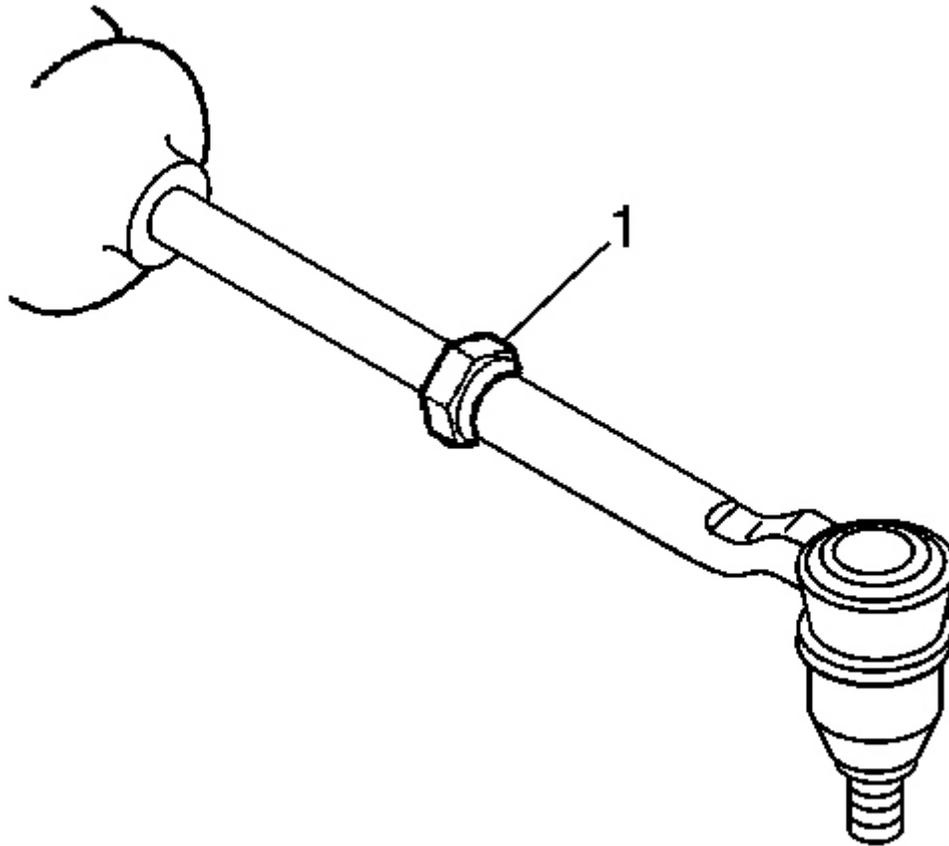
View Of Steering Linkage Inner Tie Rod Nut
